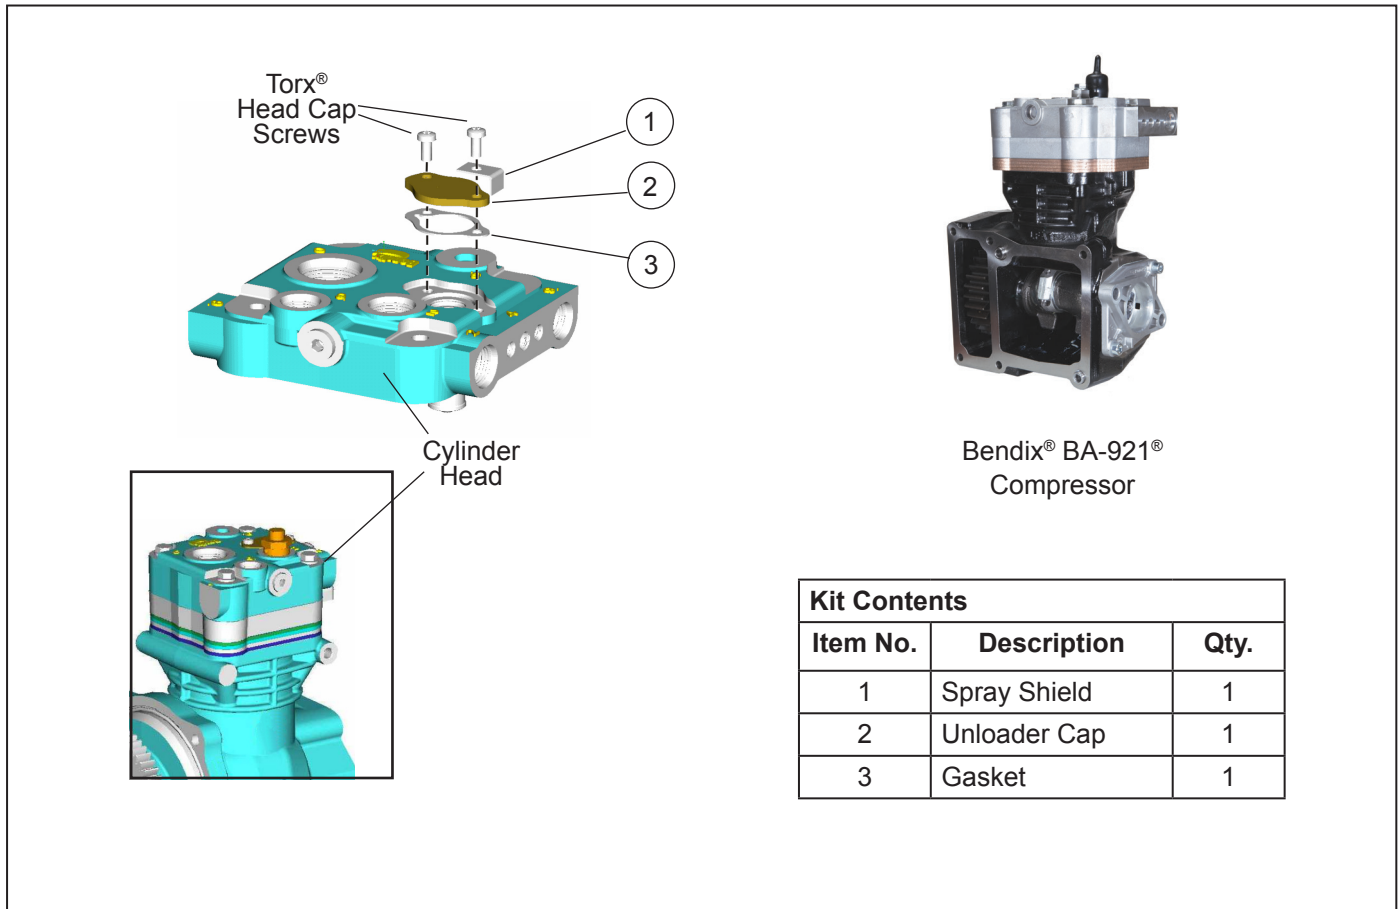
Bendix® BA-921® Compressor Unloader Cap Replacement Kit Contents
